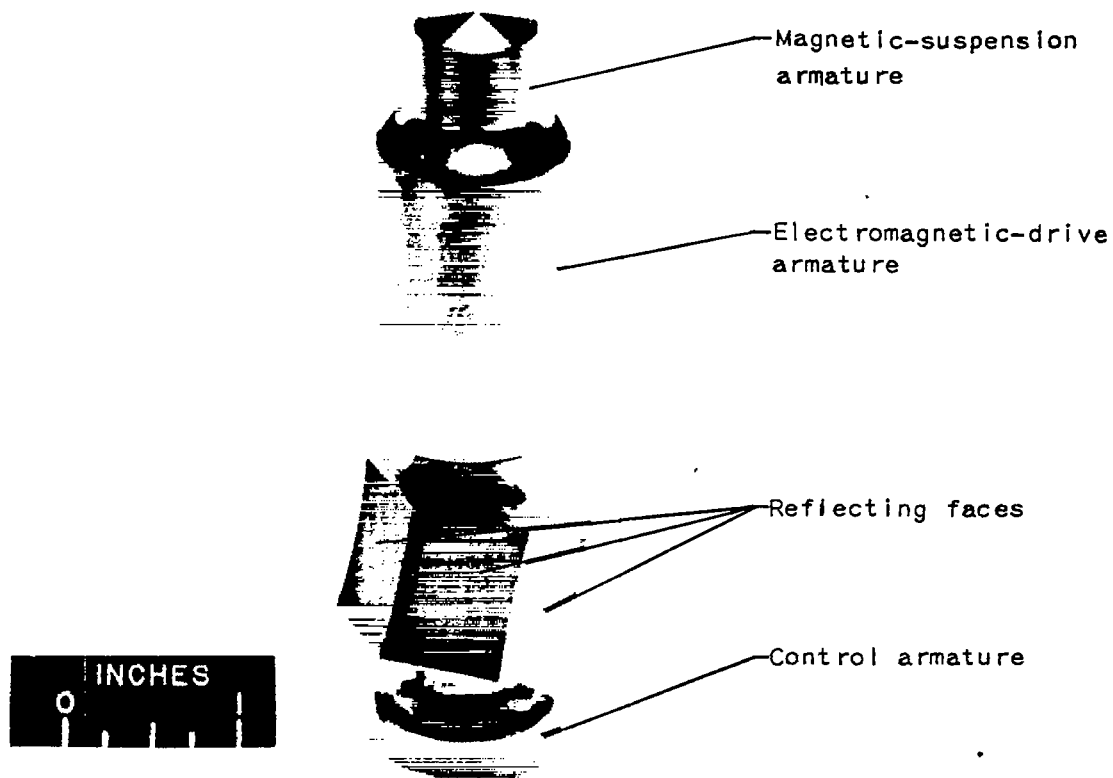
Rotor used with magnetic suspension and drive in ultrahigh-speed camera.
